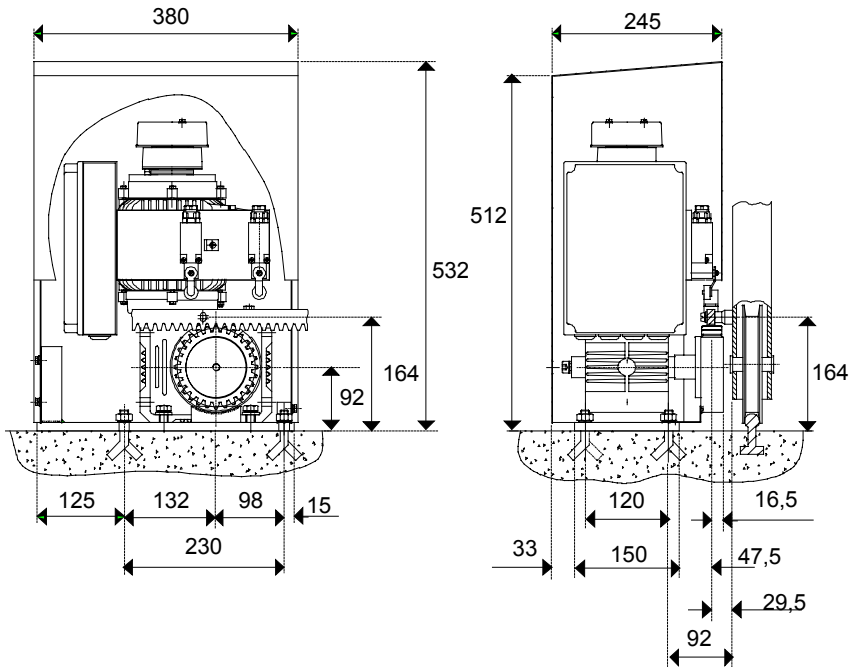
Dimensional drawing for type DS 1200 with gear rack and gear
